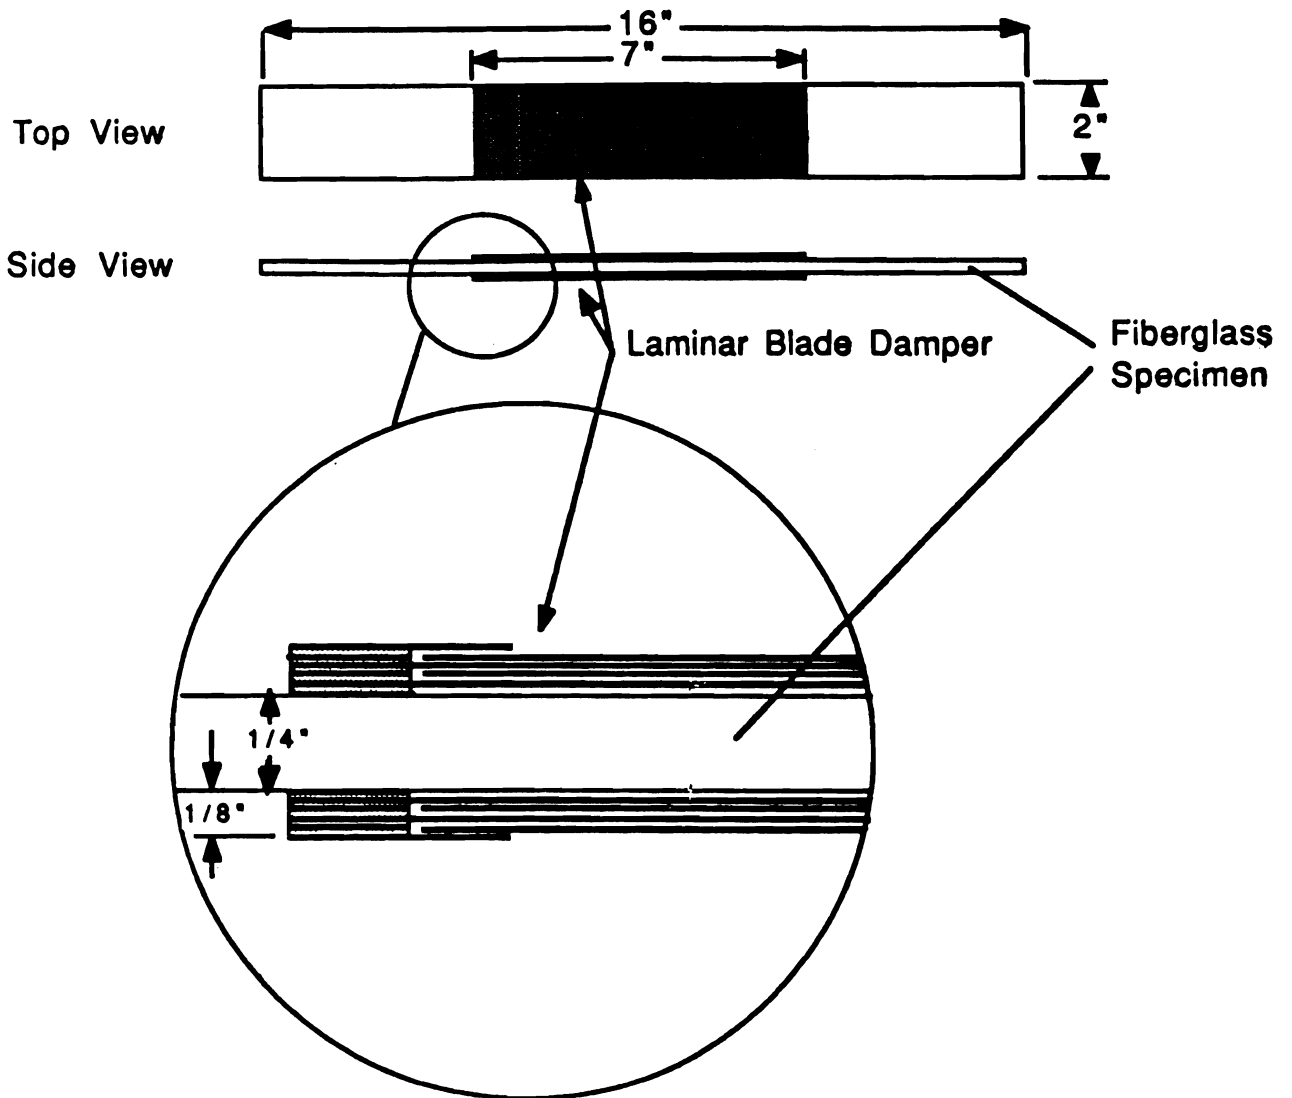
Second Prototype Laminar Blade Damper Mounted on Fiberglass Sample
